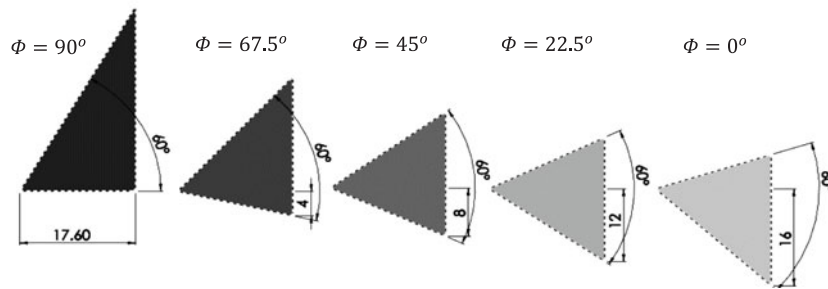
Cross-sectional area of the weld groove in a quarter of the pipe circumference.
